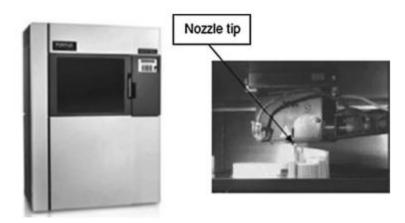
Typical Stratasys machine showing the outside and the extrusion head inside (courtesy of Stratasys)
